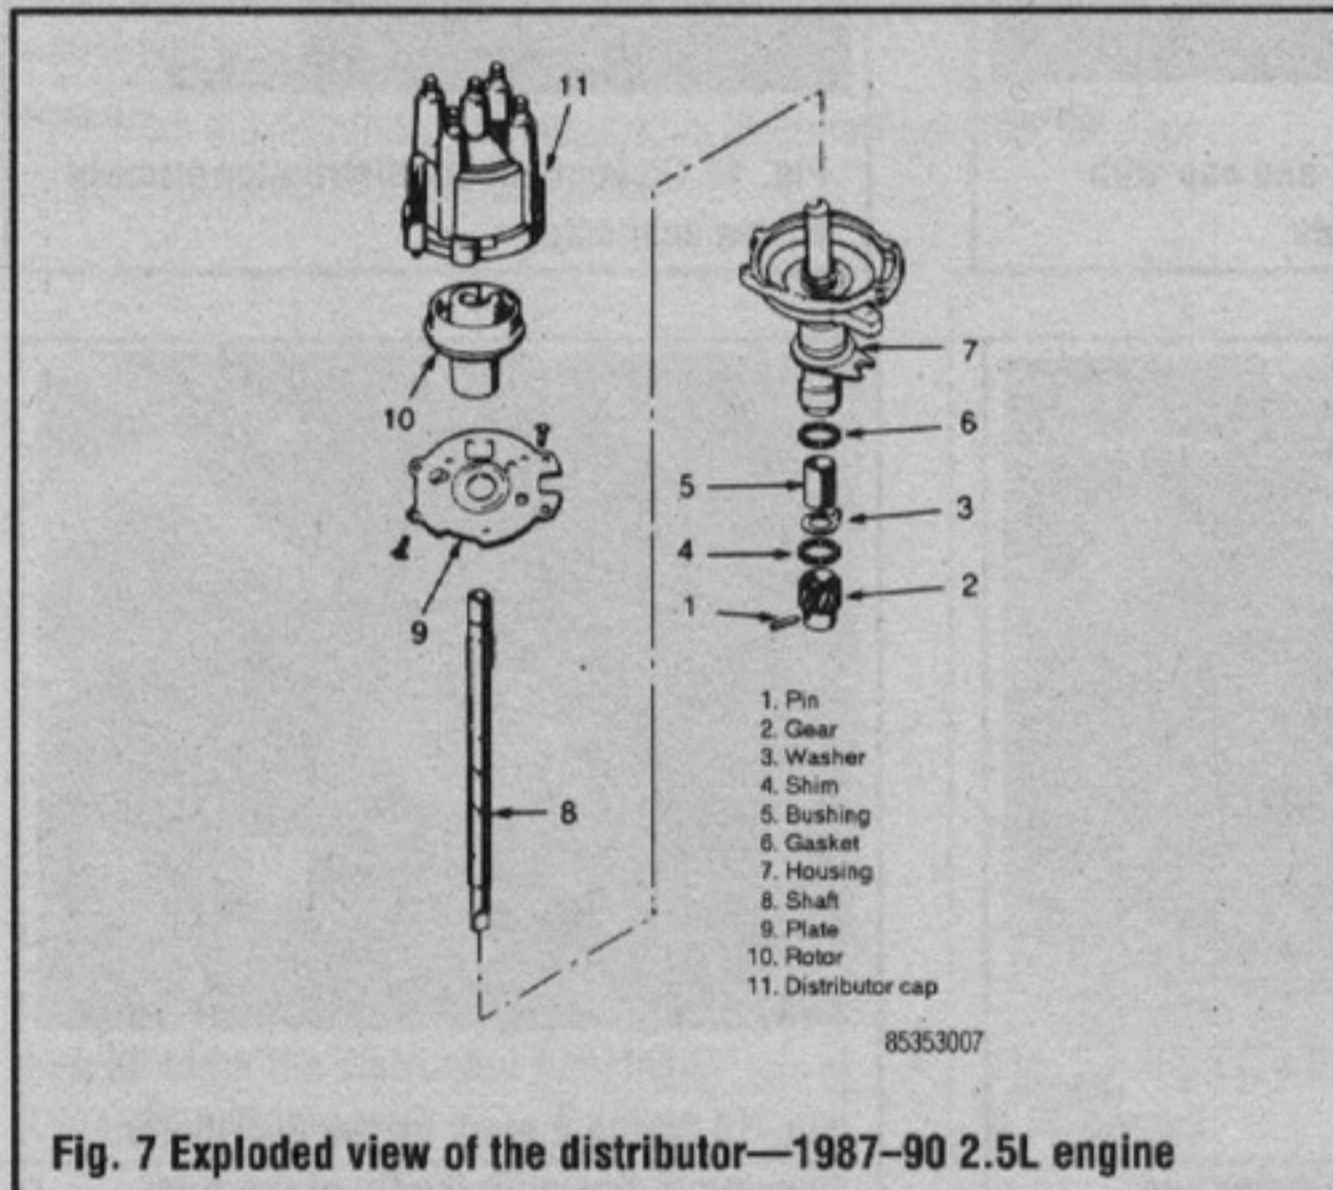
Exploded view of the distributor—1987-90 2.5L engine
